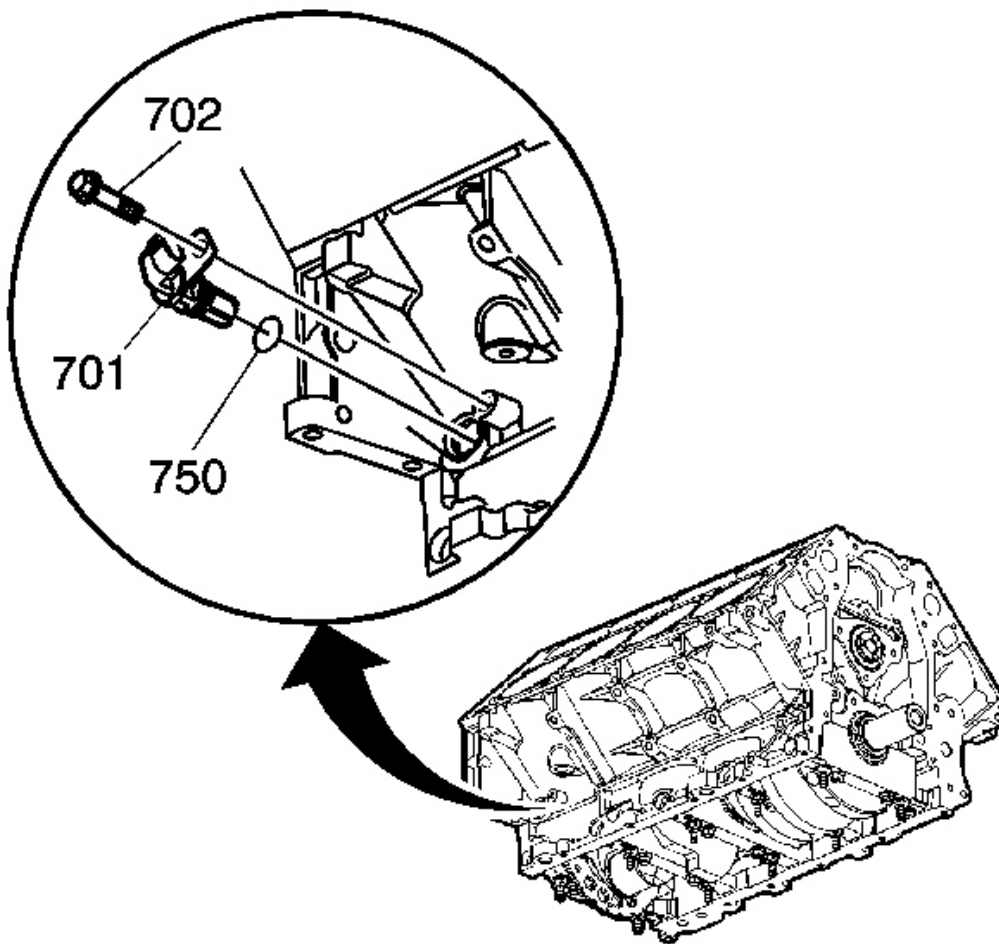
View Of Crankshaft Position (CKP) Sensor, Bolt & O-Ring
